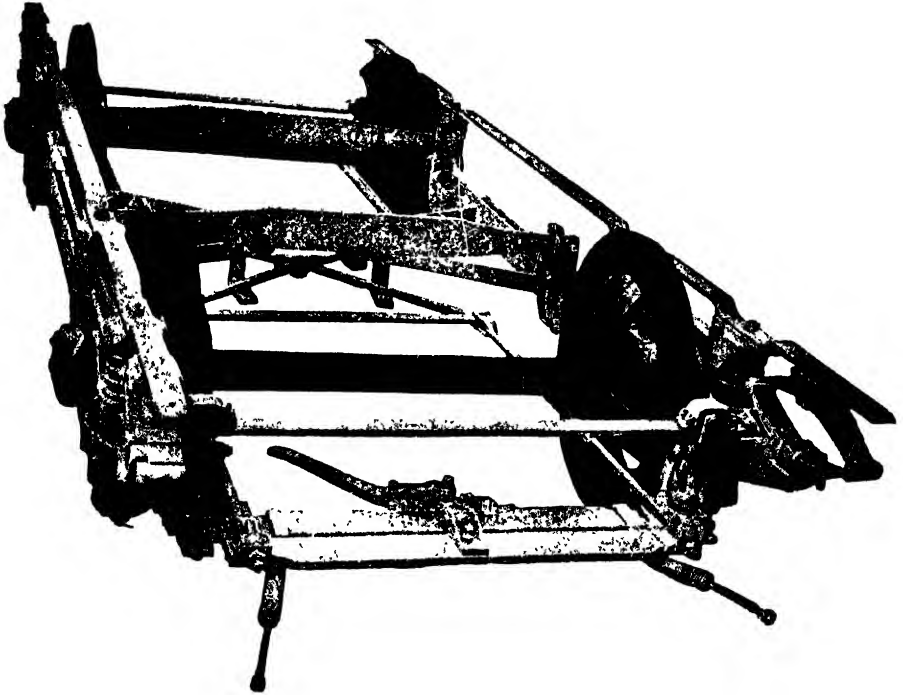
End View of Peckham Radial-axle Truck, showing swinging motor suspension-bar and brake gear (Brush Electrical Engineering Co.).
